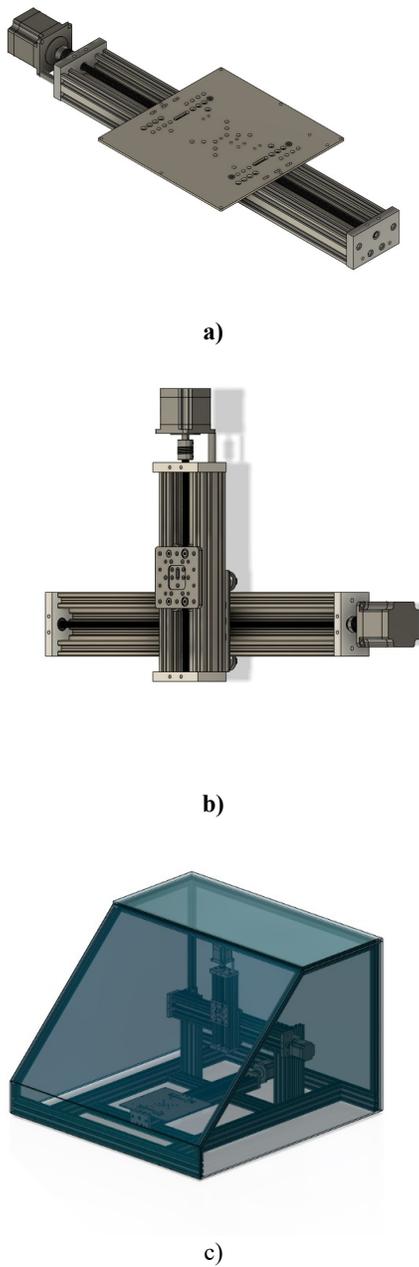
a) The Y-axis; b) The X and Z axis in combination; c) The overall structure of the PCB milling machine
